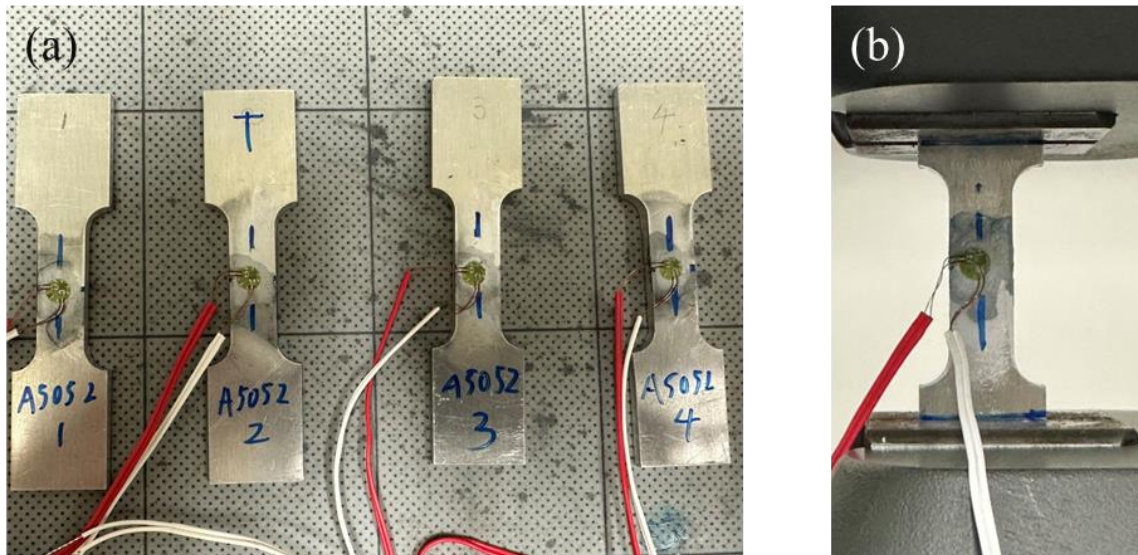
The specimens with strain gage attached used in the tensile testing. (a) Bi-axial strain gage attached to specimens in z -axis and x -axis. (b) Specimens set to the tensile testing machine AG-50kN.
